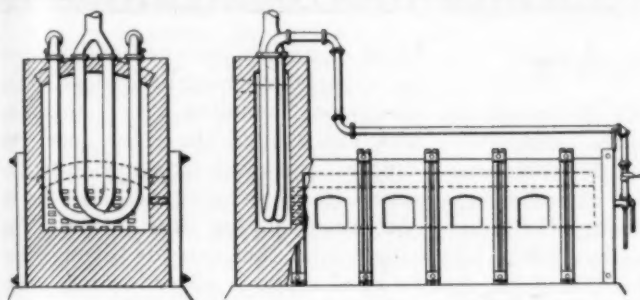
RECUPERATOR TUBES ON OIL-FIRED FORGING FURNACE
